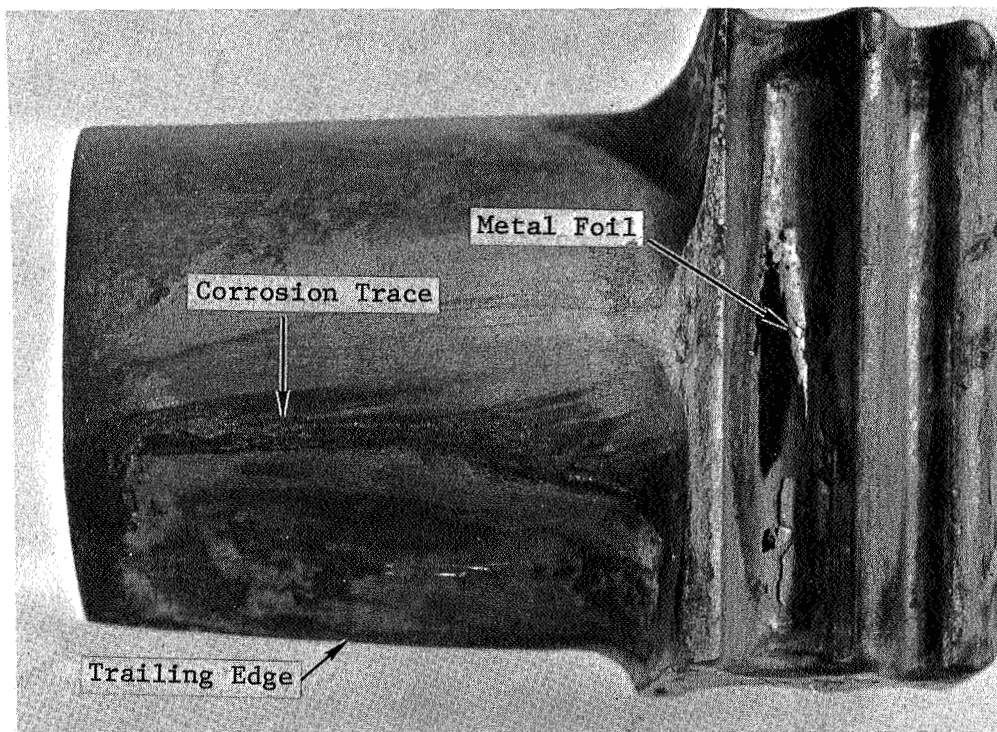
Convex Side of U-700 First Stage Turbine Blade After 2000-Hour Endurance Test. (C66011346) Mag: 5X
